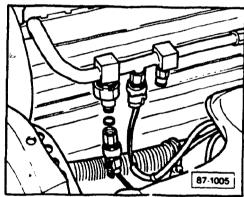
A/C high pressure cut-out switch (5-cylinder engine)
